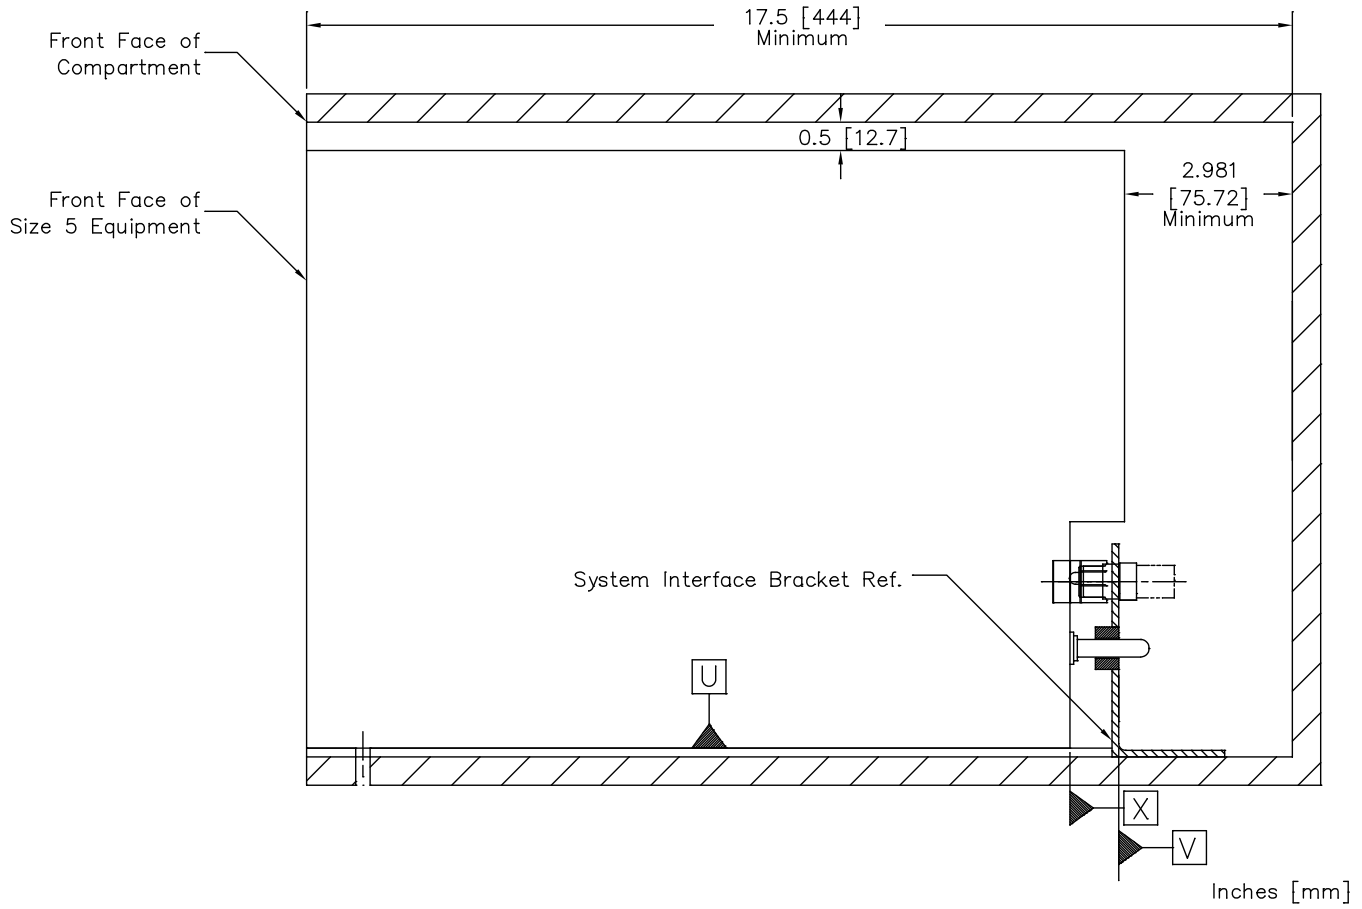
B – GAIN Size 5 Compartment and Equipment Installation Details Side View
